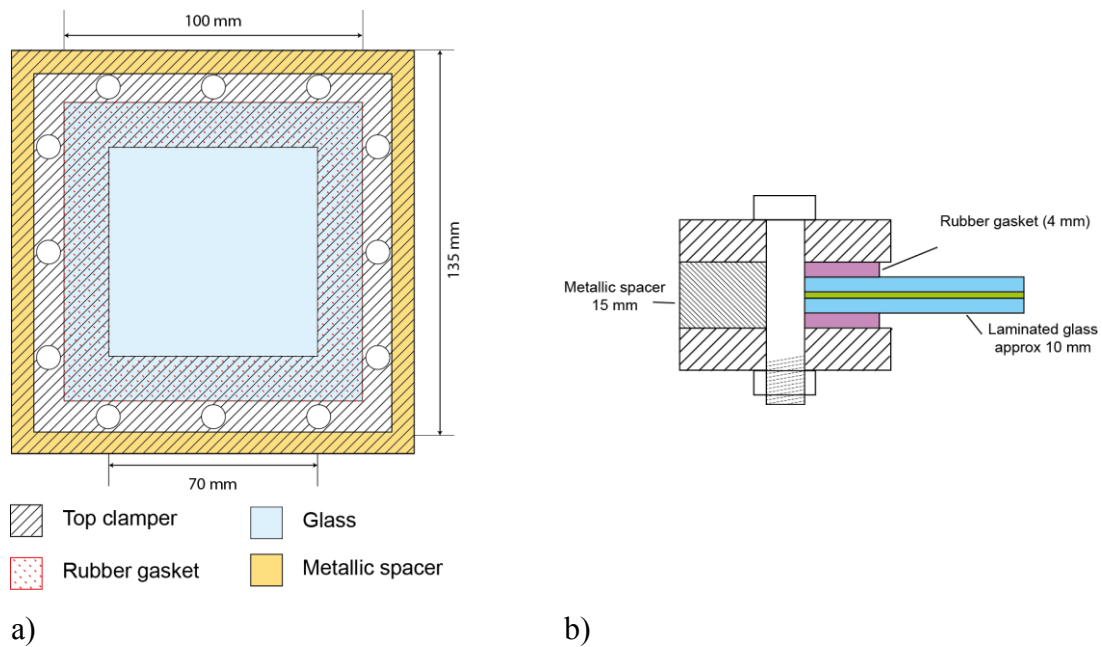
Clamping system for drop weight specimen: a) clamper design front view and b) clamper cross section view.
